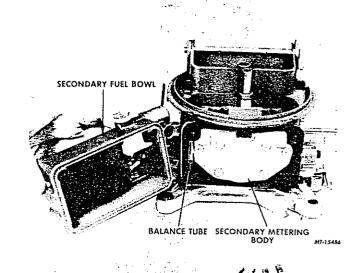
REMOVAL OR INSTALLATION OF SECONDARY FUEL BOWL (MODEL 4160)
